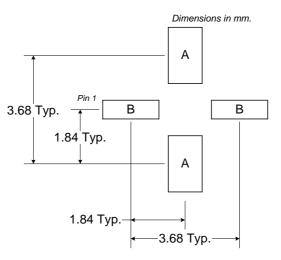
PCB Metal Land Pattern - RF204X (Top View)
